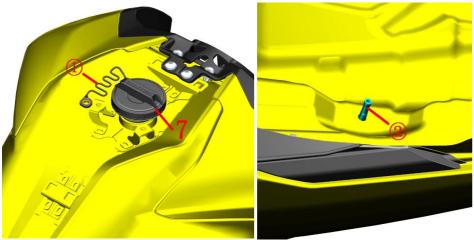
FUEL TANK COVER COMPONET		Oil pump	CHK ADJ	Q
